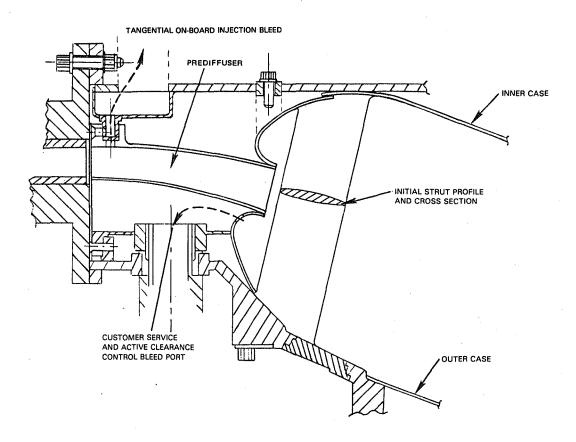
Sector Combustor Rig Diffuser Section Mechanical Design
